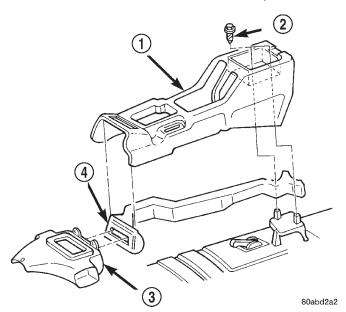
Floor Duct and Console Rear Duct Remove/ Install
